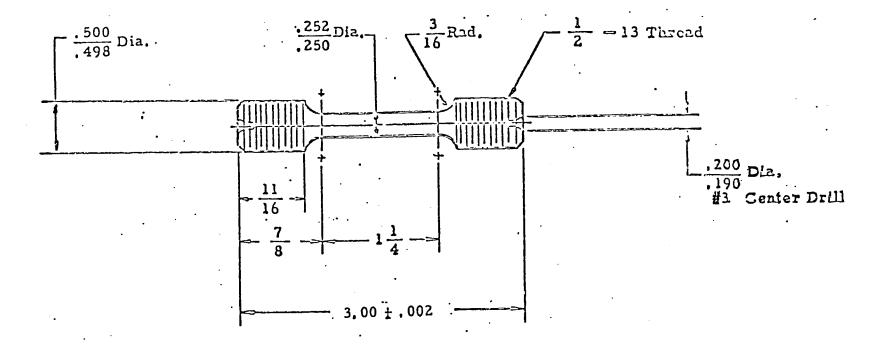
Smooth Tensile Test Specimen. Dimensions in inches.
